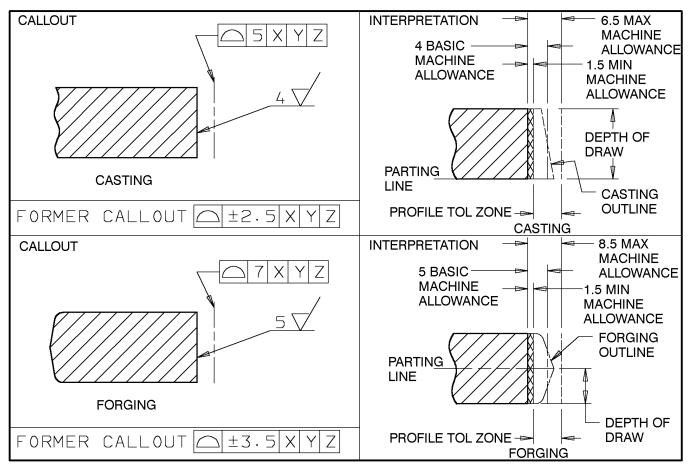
Machine Allowance - Drafted Surface (Parted Perpendicular to Machined Surface)
